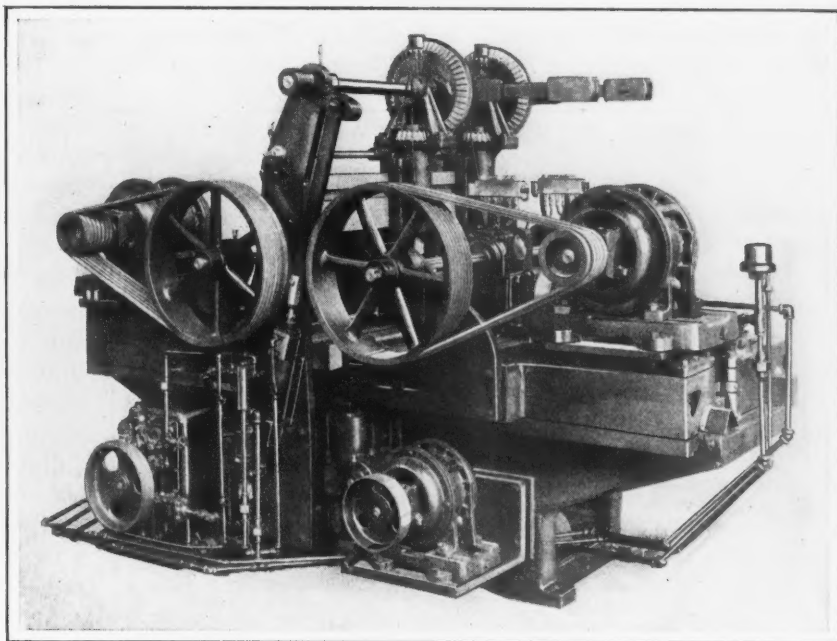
Machine Equipped for Boring and Facing Radiator Loops
